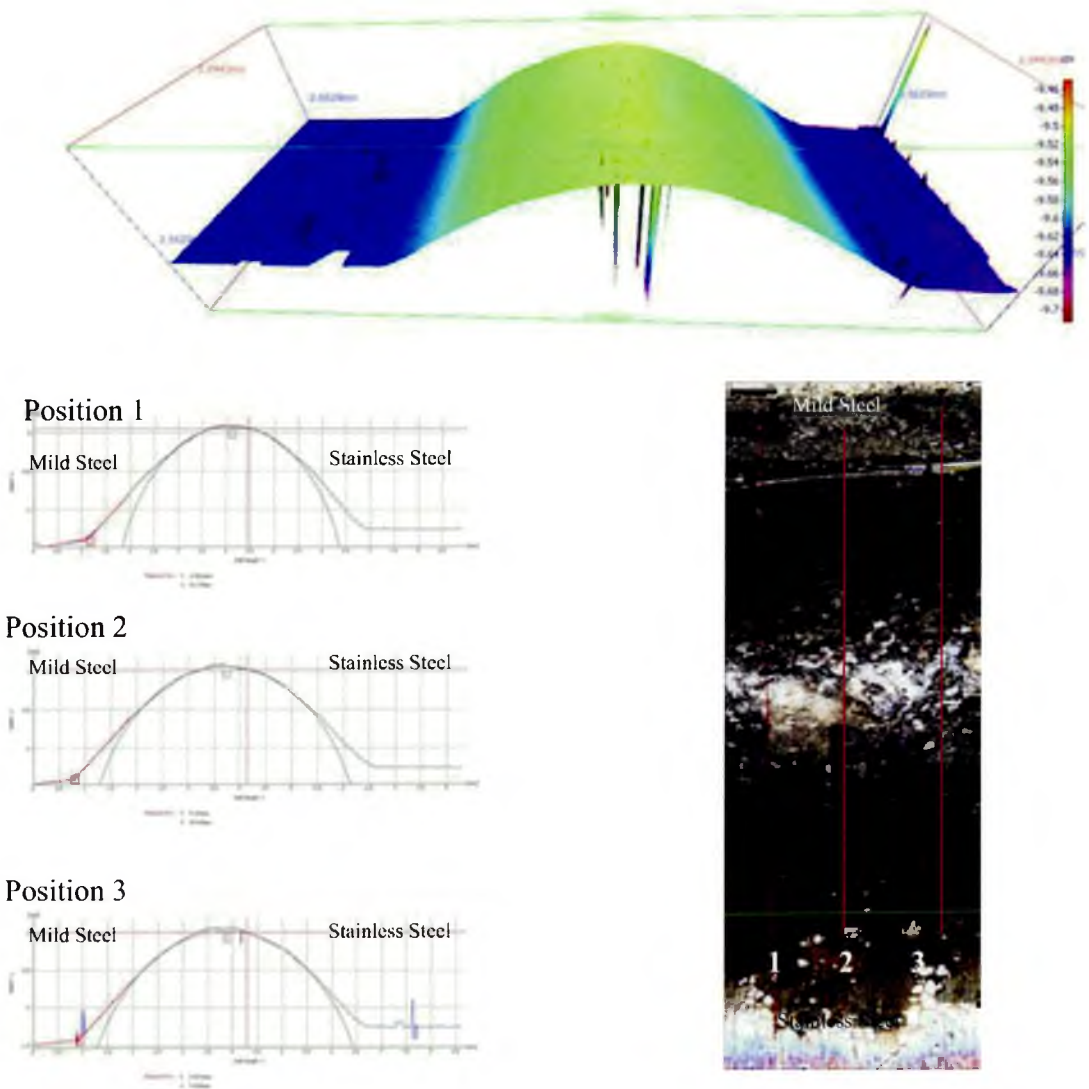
IFM 3D surface image and surface profiles for the front of the weld bead of sample C1.6.3
